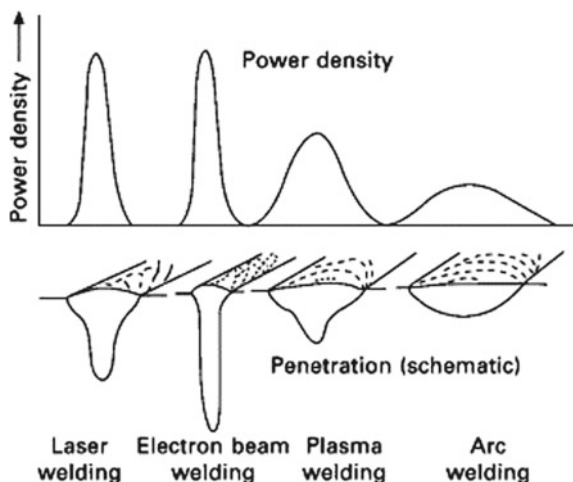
Welding power and weld beam intensity for different welding processes
